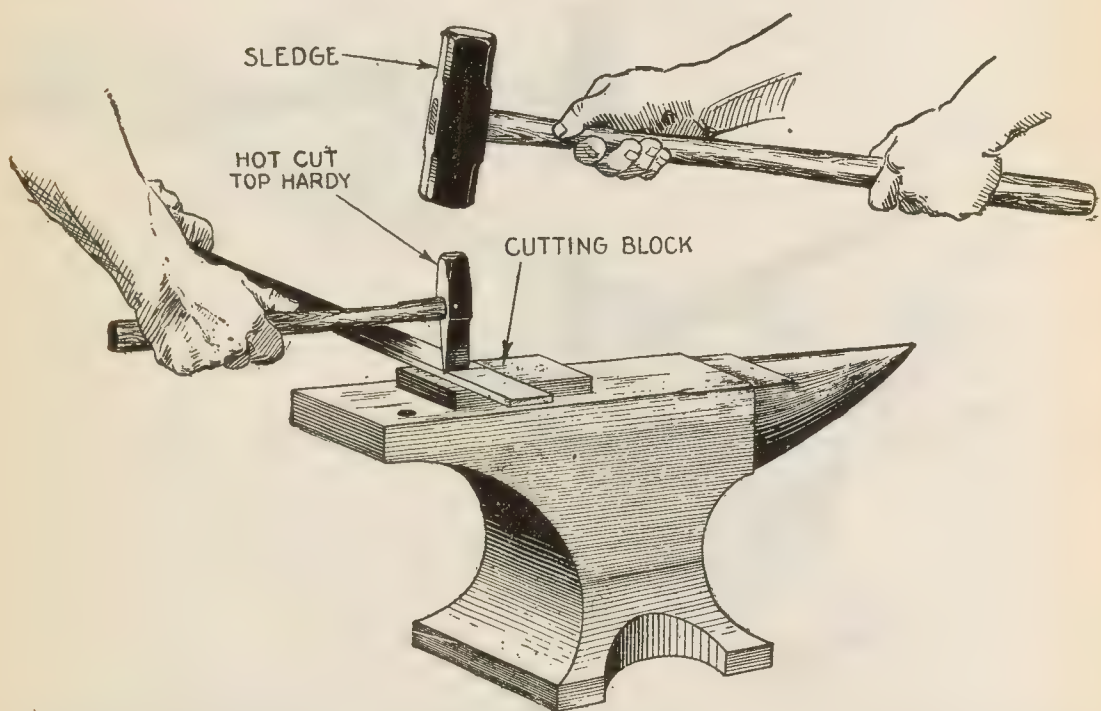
,946.—Cutting 3. Heavy cutting with hot (or cold cut) top hardy on cutting block. This is done in a similar manner as in fig. 9,945, except that the piece to be cut is placed on the cutting block which is held by placing its tang in the head hole.
